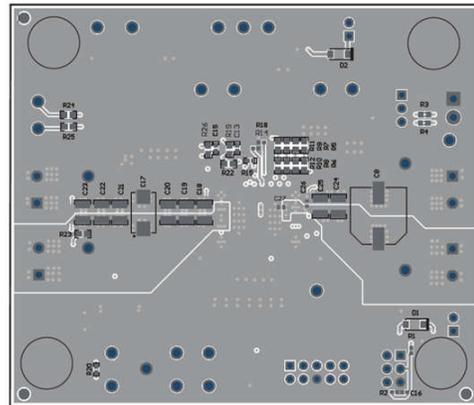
TPSM8S6C24SEVM-1PH Bottom Side Component View (Bottom View)
